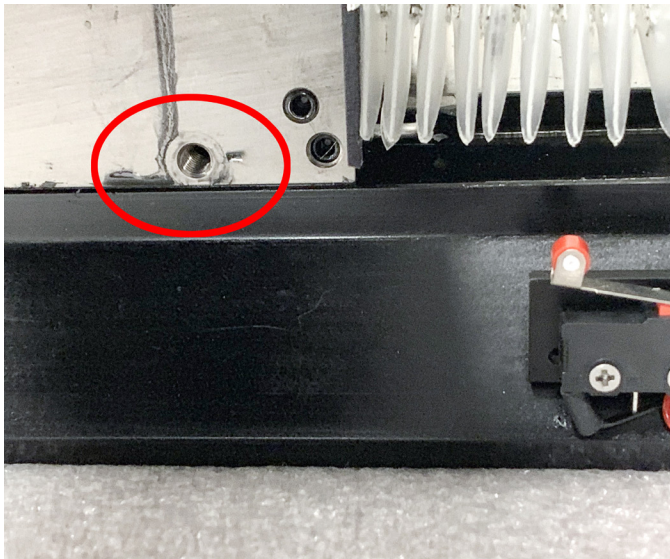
The red oval shows the location of the eccentric trigger mounting hole on the ball screw saddle.
